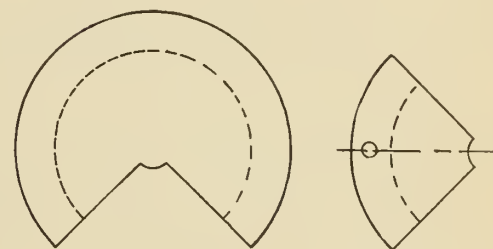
Centre Piece for Jig. Fig. 4—Quarter.
